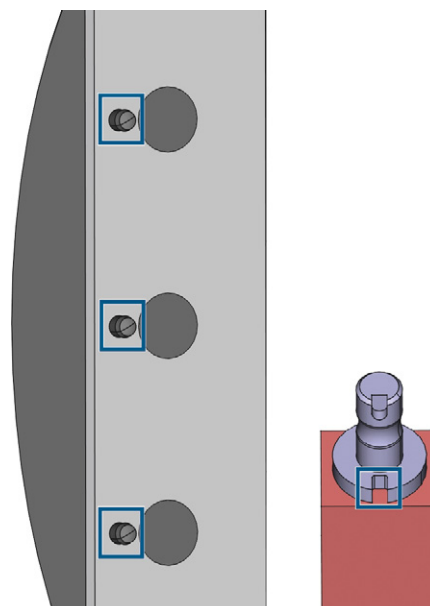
POSITIONING PINS (LEFT MARKINGS) MUST LIE IN THE GROOVE IN THE SHAFT (RIGHT MARKING)
